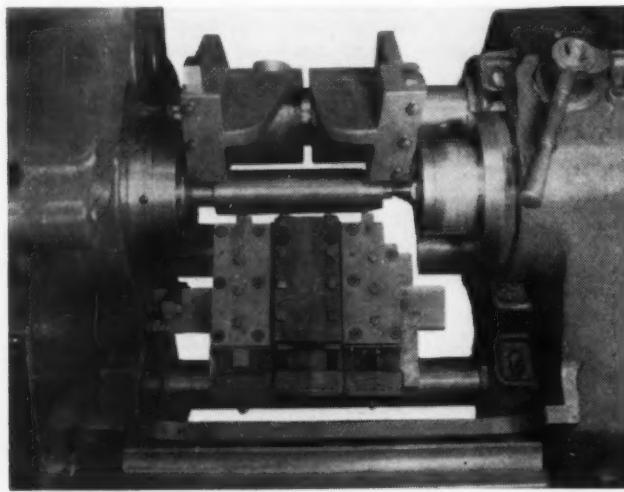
TOOLING SETUP FOR 75-MM SHELL FOR SIMULTANEOUSLY ROUGH-TURNING DIAMETER AND FACING END
